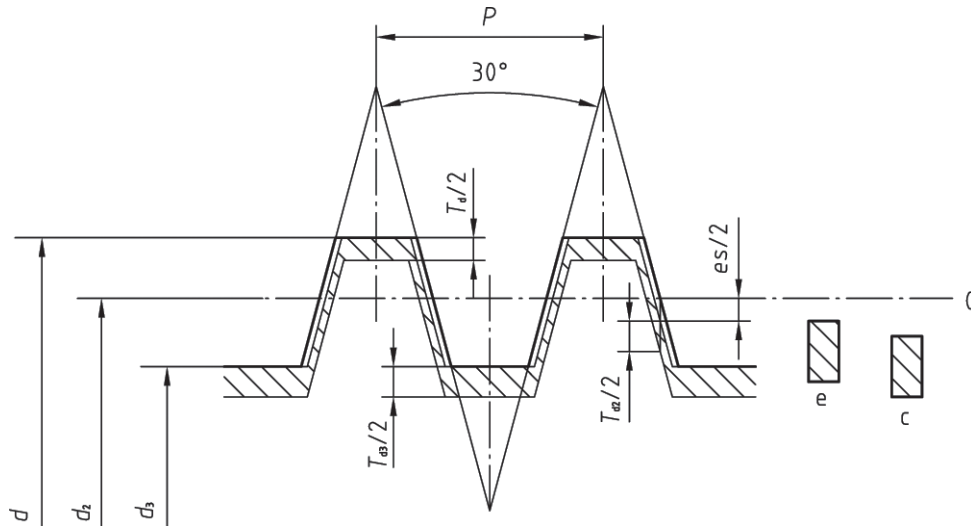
External threads with tolerance positions c and e for the pitch diameter
